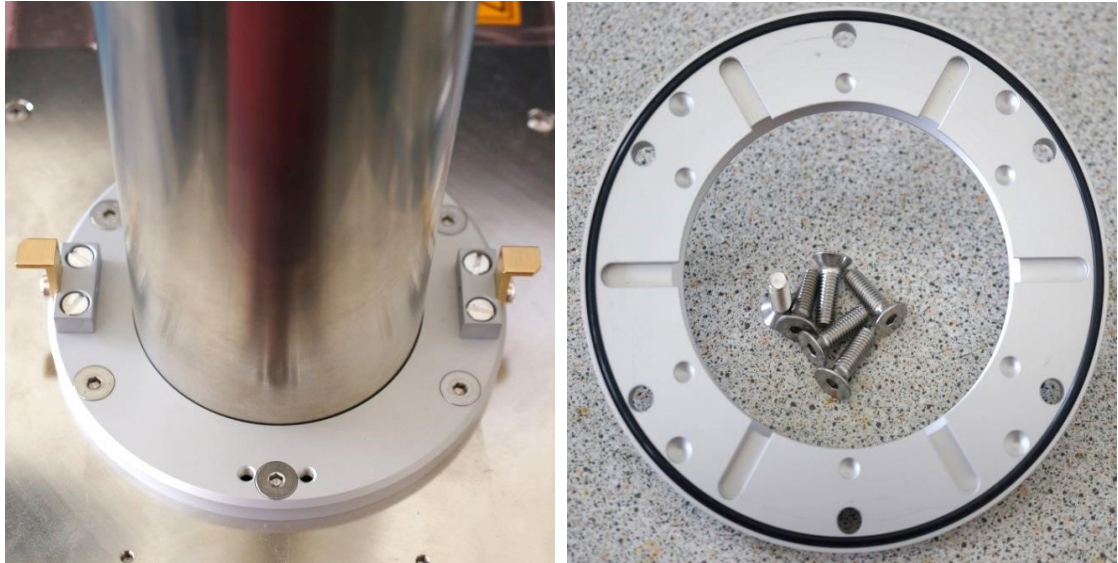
Dewar Holding Ring with Latching Hooks Mounted and Unmounted
